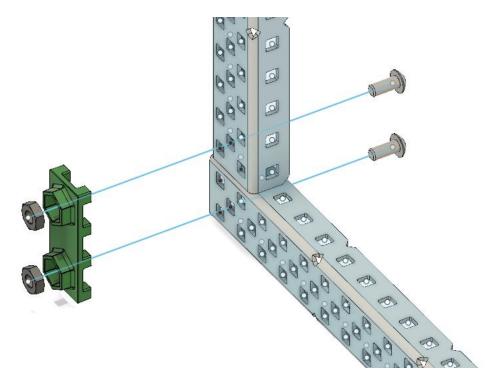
Assembly of the 8-Post Hex Nut Retainer
